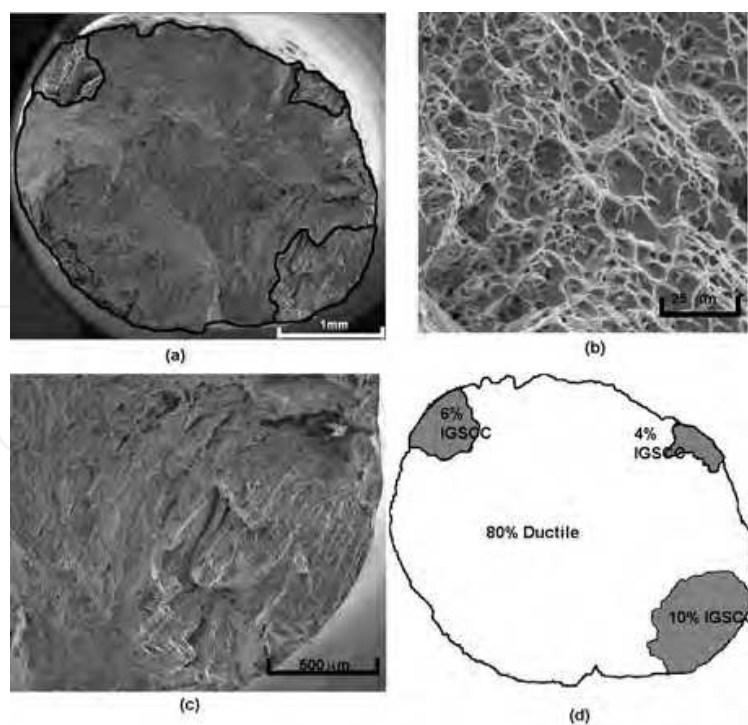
SEM micrographs of Alloy 182 weld fractured surface of SSRT at 325°C in PWR primary water with 25 cm³ H₂ (STP).kg⁻¹ H₂O and at strain rate of 3x10⁻⁷ s⁻¹ (a) overview (b) detail of ductile fracture (c) detail of IGSCC fracture failure (d) fraction of fracture.
